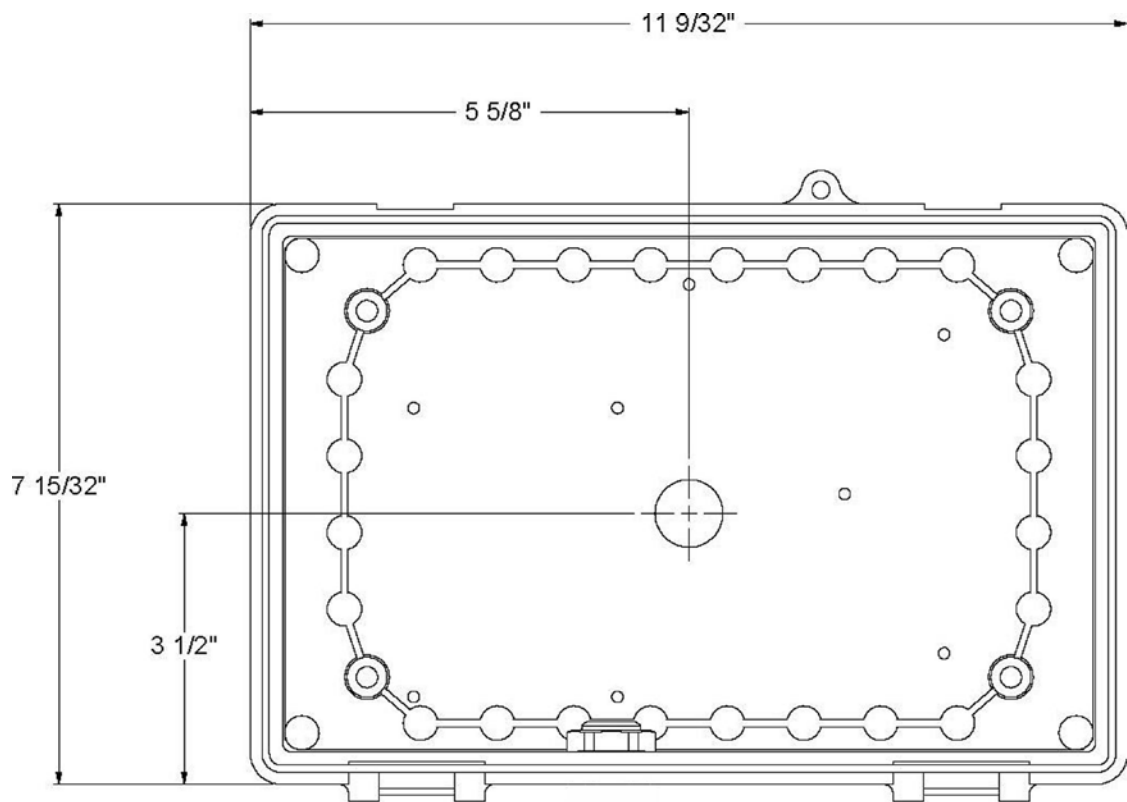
MRU and Remote MRU Rear Cable Penetration Location (Front View with Lid Not Shown)
